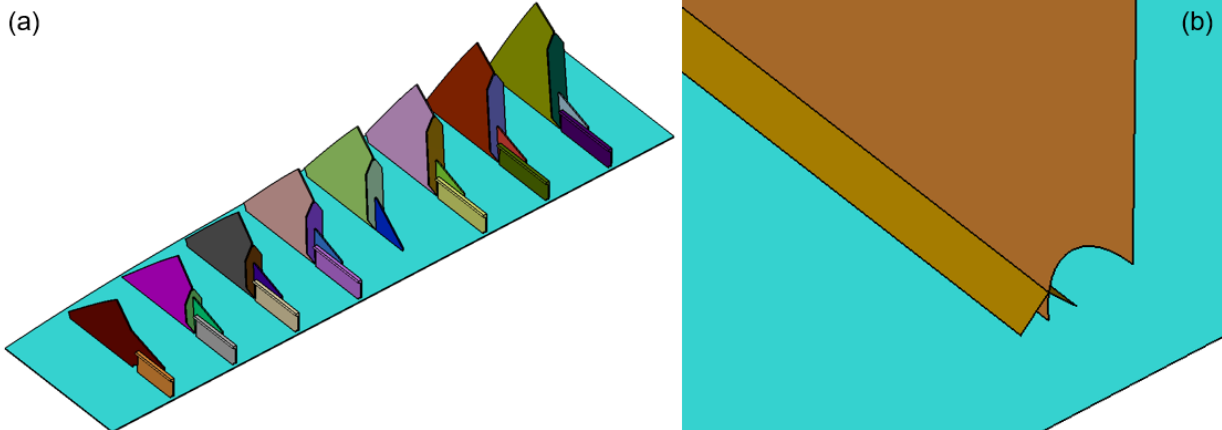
(a) Representative sub-assembly and (b) detail of modeled surface weld
